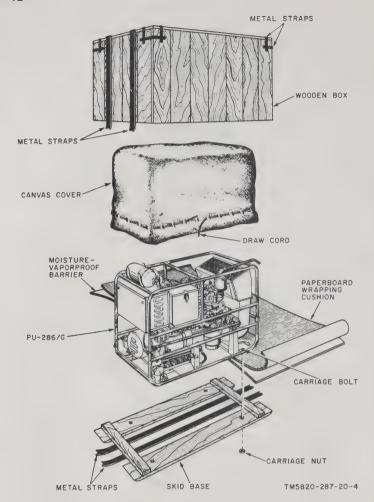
Packaging and packing diagram for Generator Set, Gasoline Engine PU-286/G.
